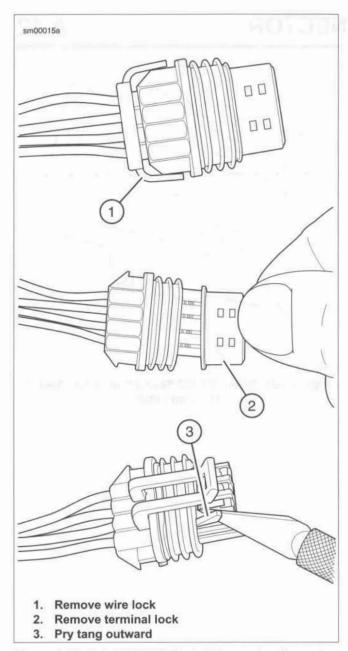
Delphi GT 150 Sealed Connector: Removing Socket Terminals
